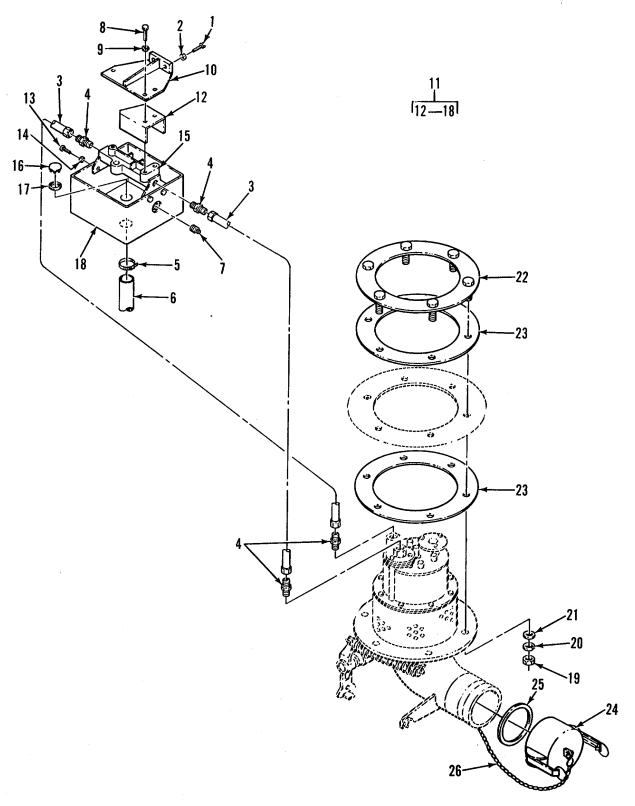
Jet Level Sensor and Bottom Load Valve (Sheet 1 of 2)
